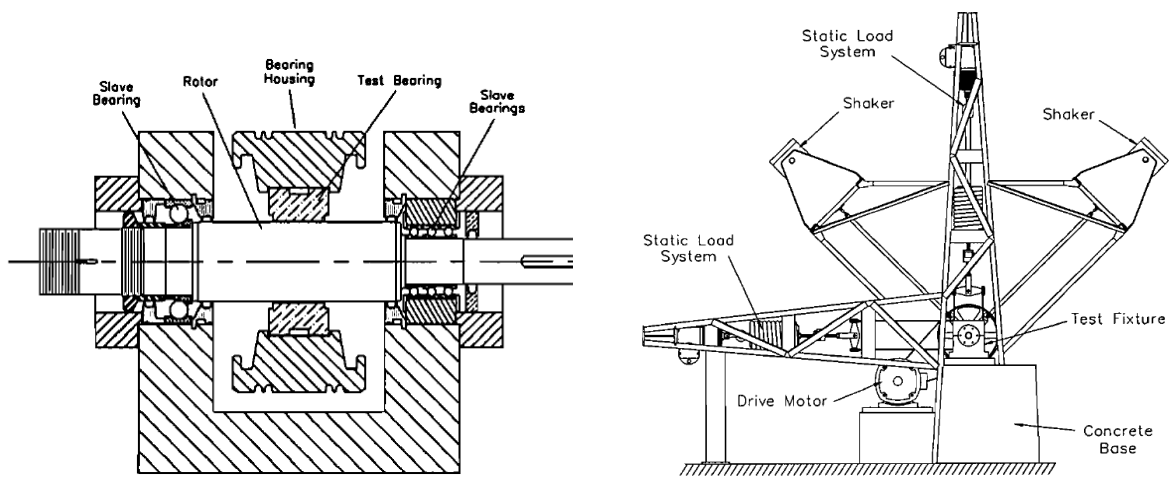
Cross-section view (left) and Test rig view with loading systems (right)
